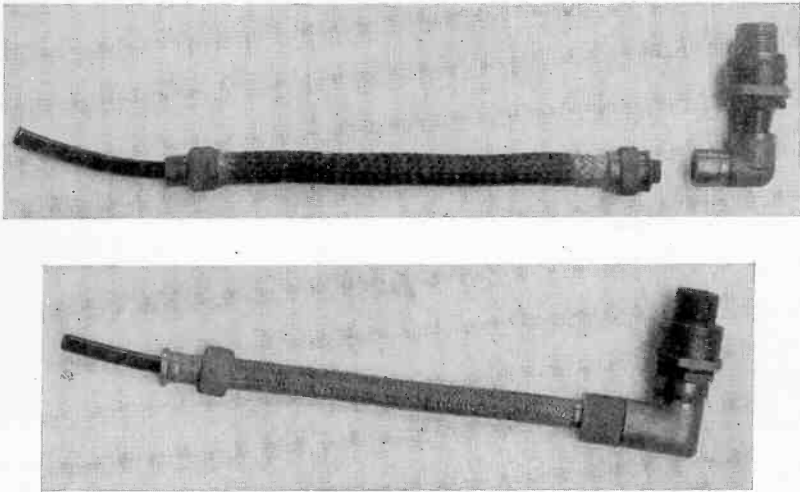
Photograph showing arrangement for connecting the flexible metal tubing to the elbow type shielded spark plug.
